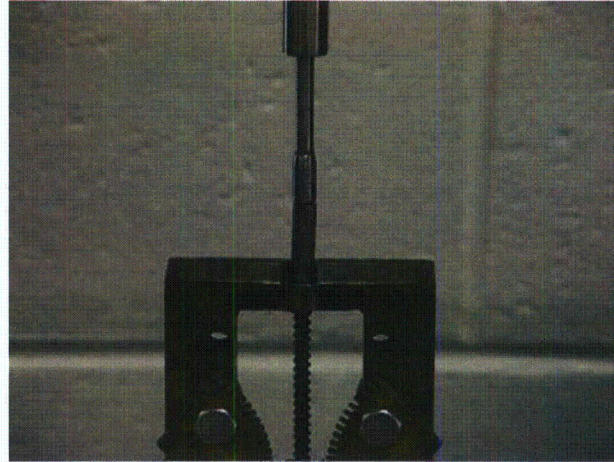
Source Assembly Tensile Test Connector and Ball Setup
